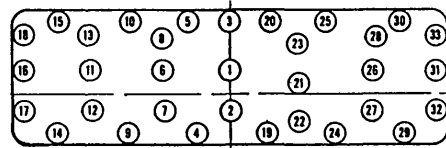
Cylinder head bolt tightening sequence, 1947-52
